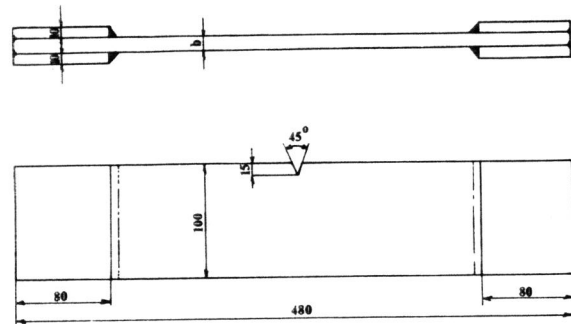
Three-Points Bend Sen-Specimen for Impact Testing
